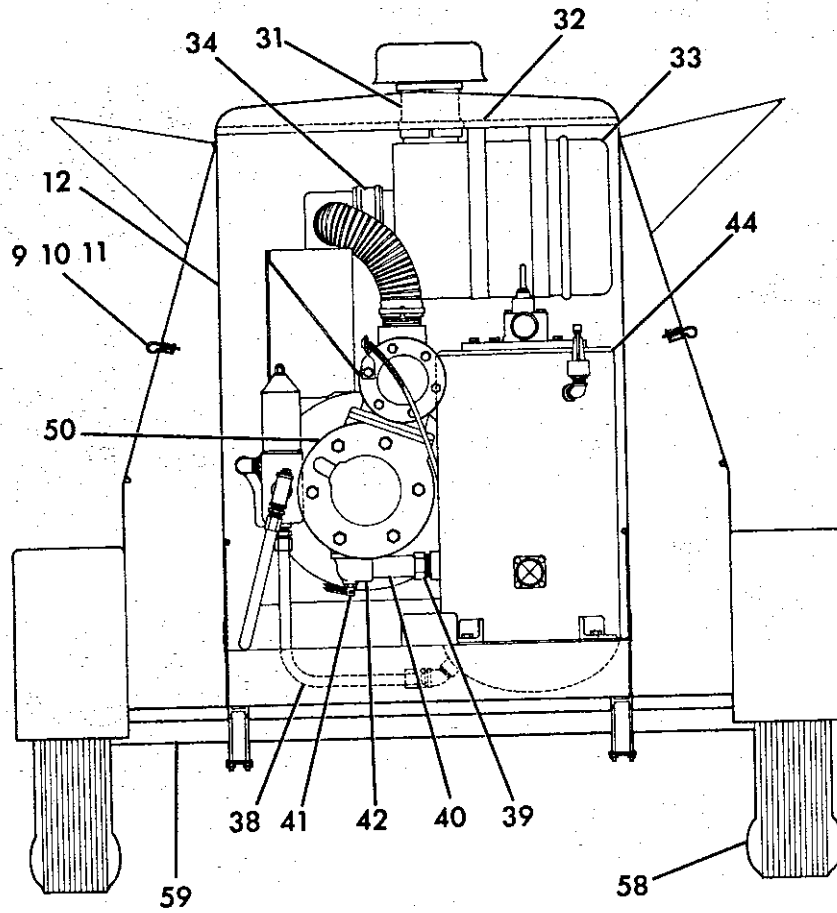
Unit Assembly (Sheet 3 of 3)
